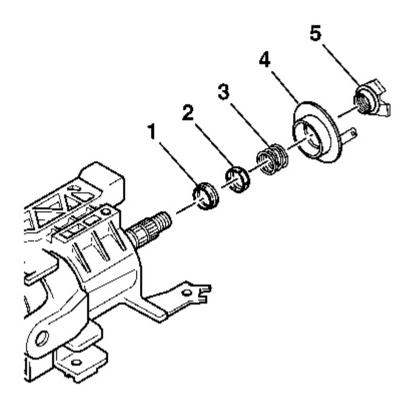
Removing Cam Orientation Plate, Turn Signal Cancel Cam, Upper Bearing Spring, Upper Bearing Inner Race Seat & Inner Race Courtesy of GENERAL MOTORS CORP.
